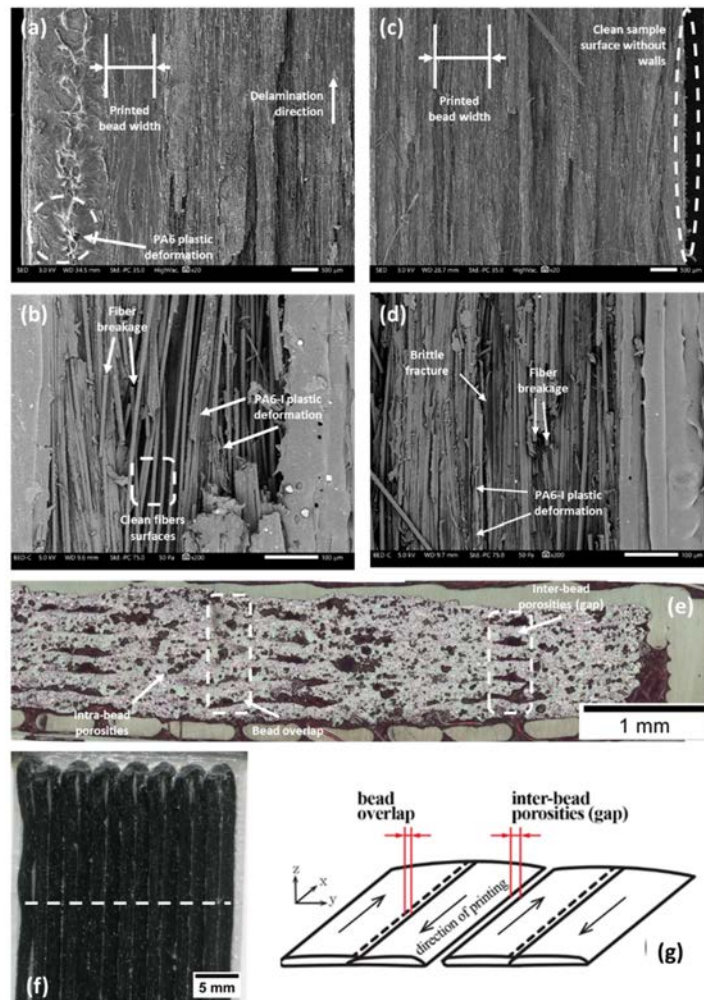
Fracture surface of delaminated (a ,c) cCF/PA6-I and (b, d) cross-sectional view of (e) cCF/PA6- (observed under optical microscopy (magnification x10) and optical images of single printed layers of (g) cCF/PA6-I. (i) Schematic illustration of inter-bead porosity and overlap.
